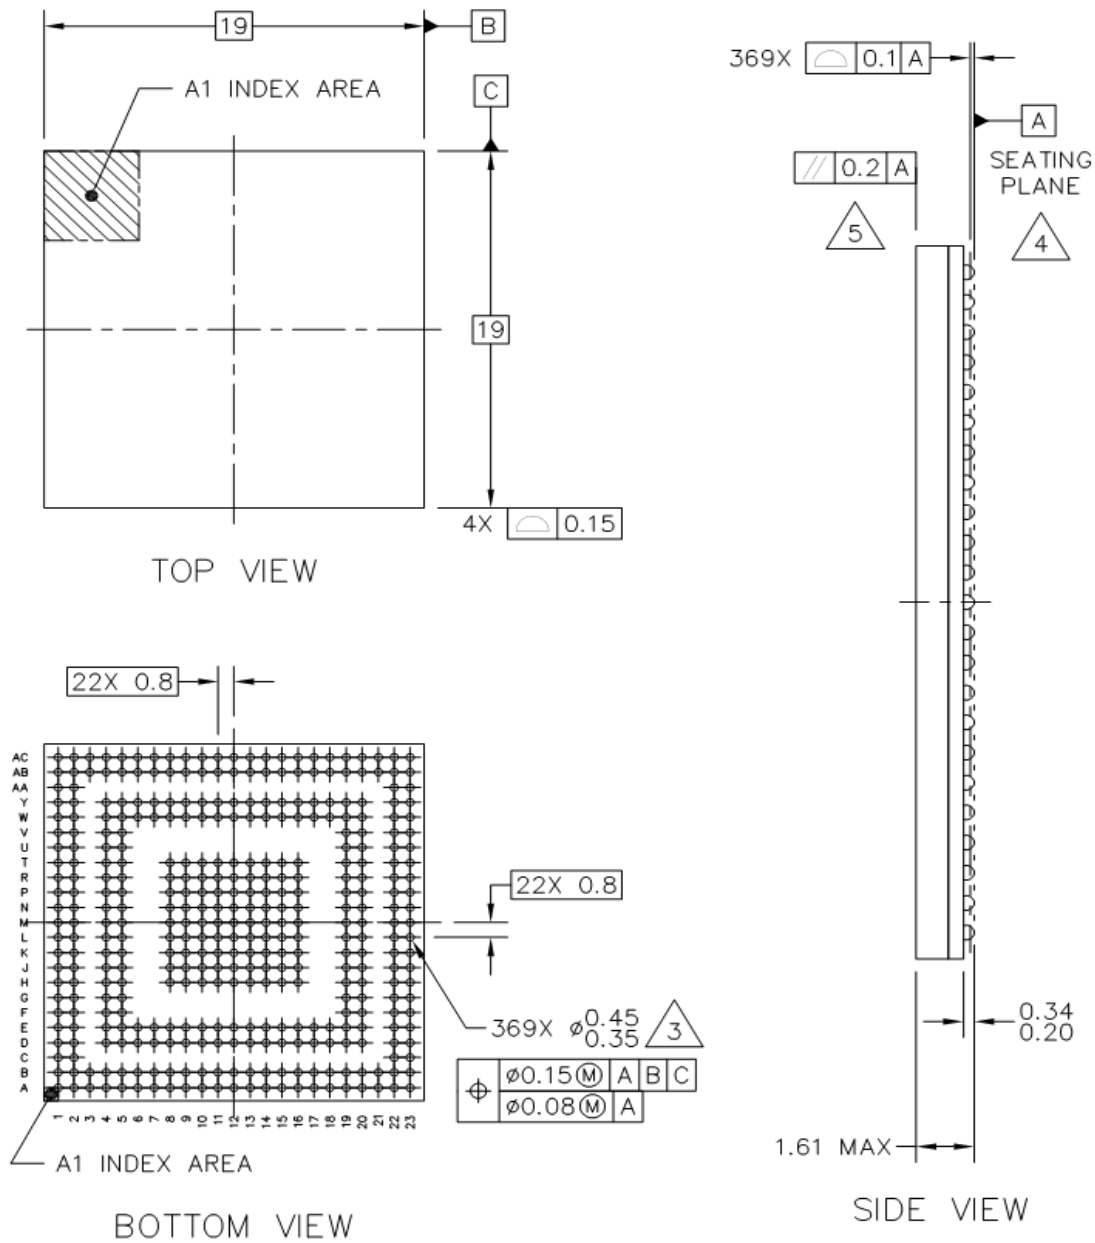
Mechanical Dimensions and Bottom Surface Nomenclature of the MPC8306S MAPBGA
